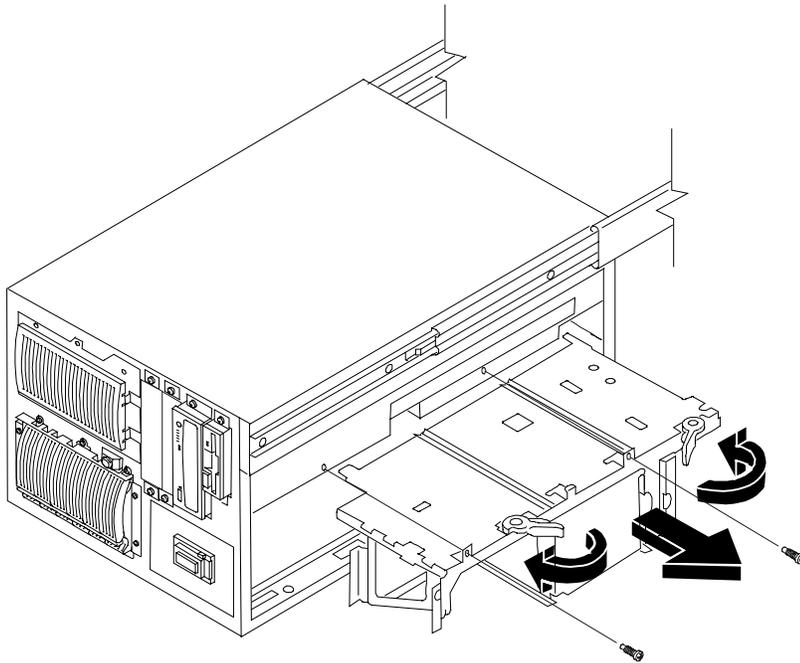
Removing the System Board Assembly from the LH 6000r NetServer
